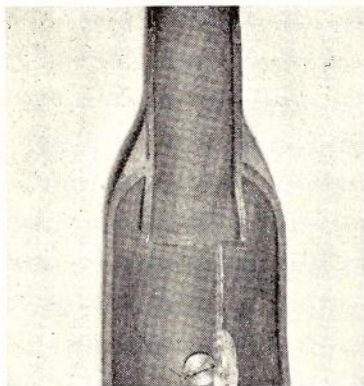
Example of method of Fitting and Wiping end of Lead Sleeve.
